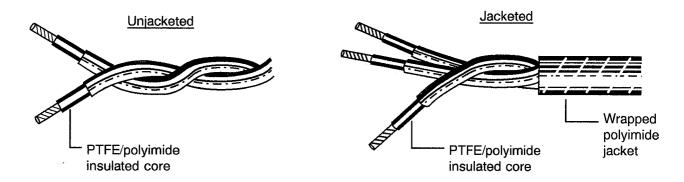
(c) - SHIELDED AND JACKETED CABLES
